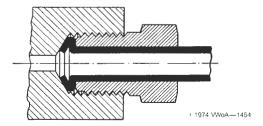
Cross section of brake line union. Notice the double flare that holds the union on the tubing.
